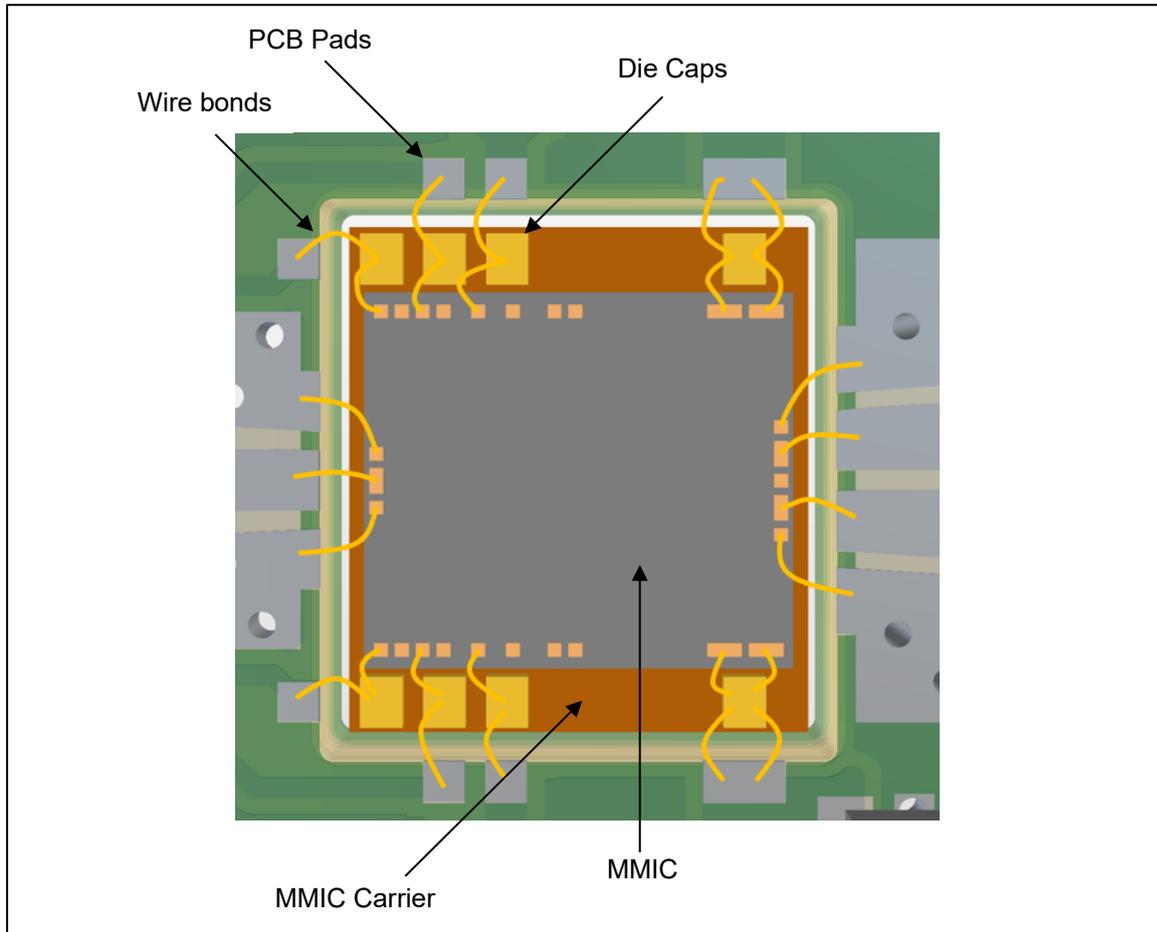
Detailed view of HPA MMIC assembly and wirebonding.
